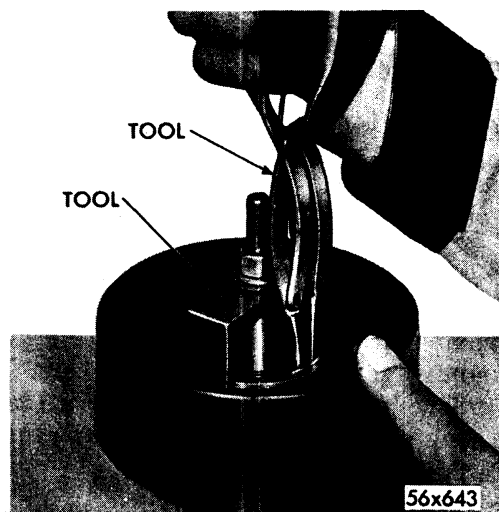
Removal and Installation of Rear Clutch Spring Retainer Snap Ring
